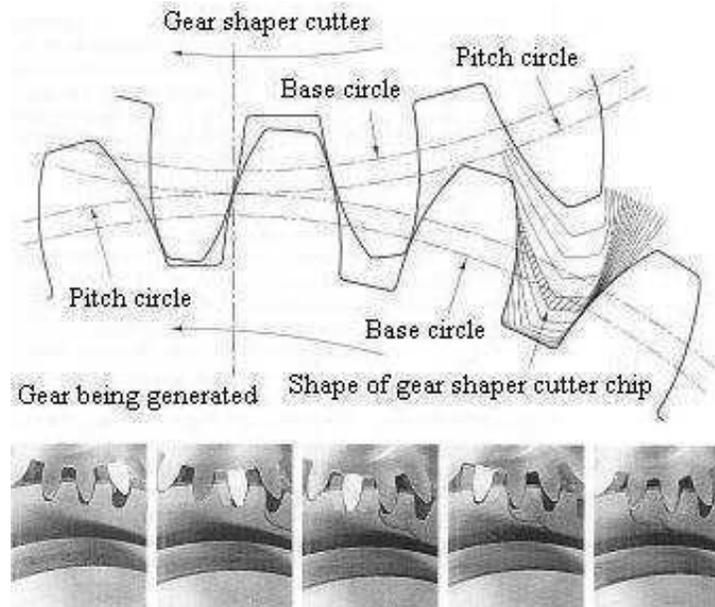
Generating action of a gear-shaper cutter; (Bottom) series of photographs showing various stages in generating one tooth in a gear by means of a gear-shaper cutter, action taking place from right to left. One tooth of the cutter was painted white.
